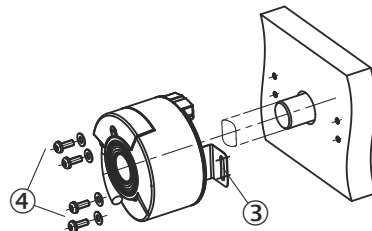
Installation through hollow shaft encoder with metal hollow shaft clamping and stator coupling
